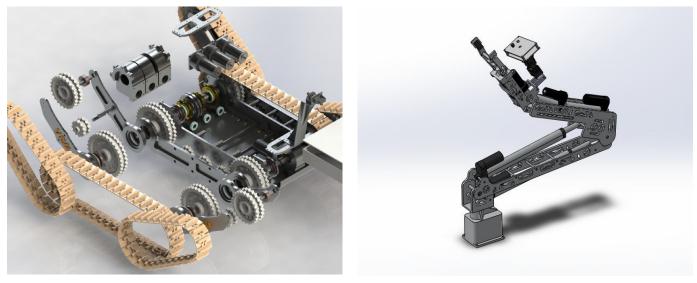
Exploded view of Hurtash rescue robot in solidwork
